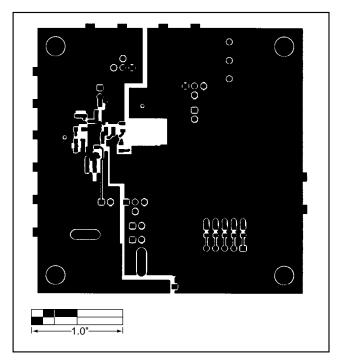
MAX2424/MAX2426 EV Kits PC Board Layout— Solder Side
